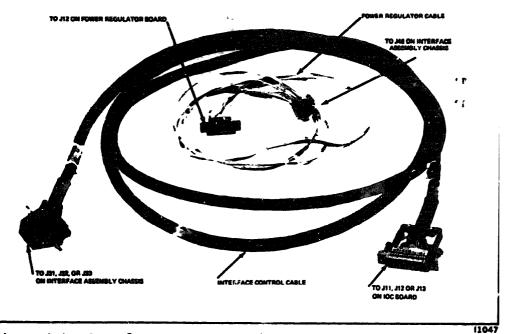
Interface Control Cable/Connector Assembly, and Power Regulator Cable
